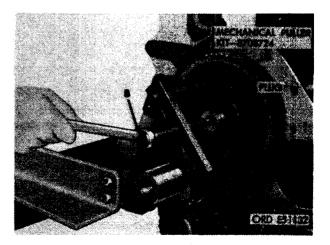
REMOVING CAMSHAFT GEAR USING MECHANICAL PULLER KIT -8708724.
